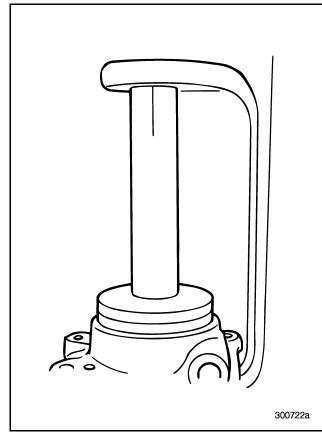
Pressing Oil Seal into Rear Mainshaft Bearing Cover
